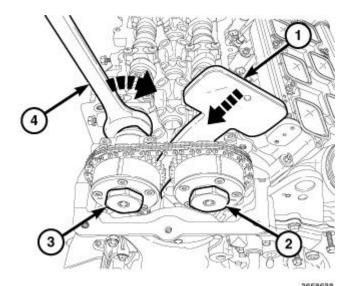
Camshaft Phaser Lock, Oil Control Valves & Wrench
